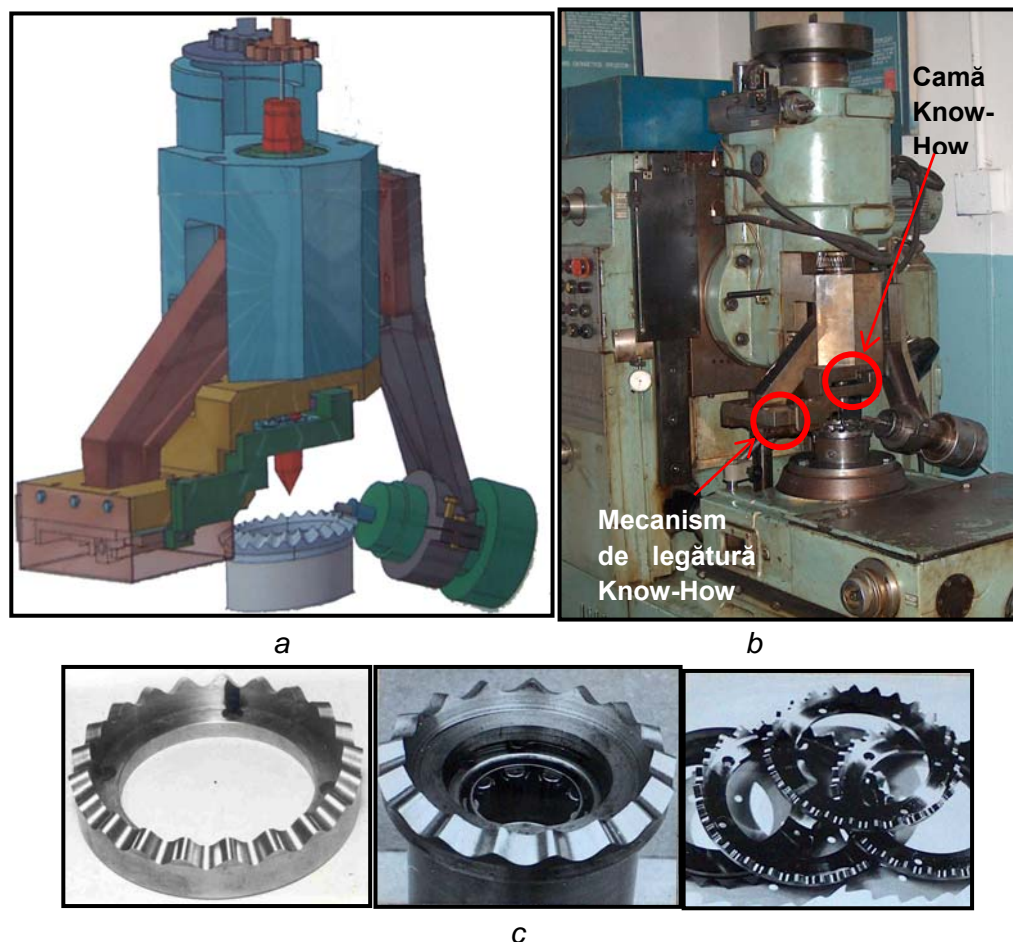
Generation device for gears with non-standard profile (a), machine-tool with fabricated device (b) and samples of fabricated gears (c).
